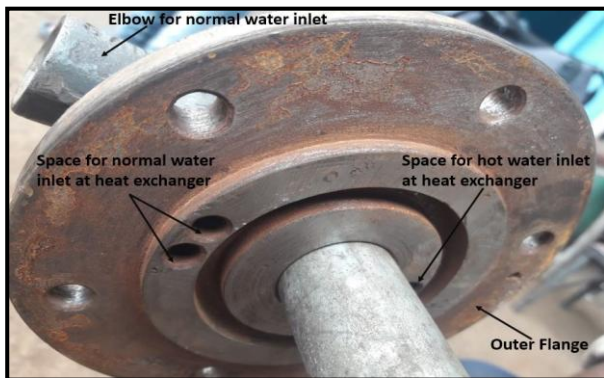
Arrangement of elbows and straight pipe on outer flange
